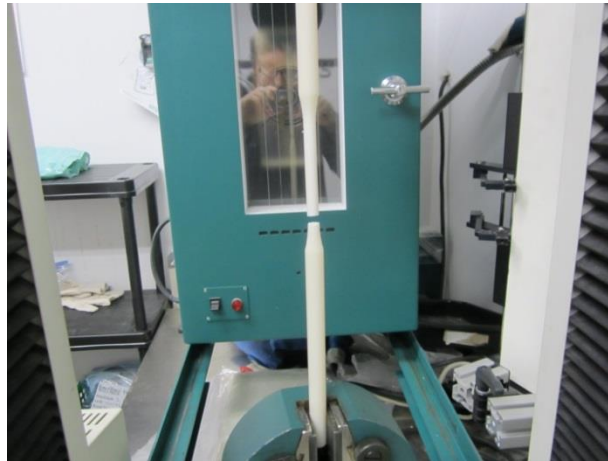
FDM Rod with Vertical Layers – Fracture after Testing
